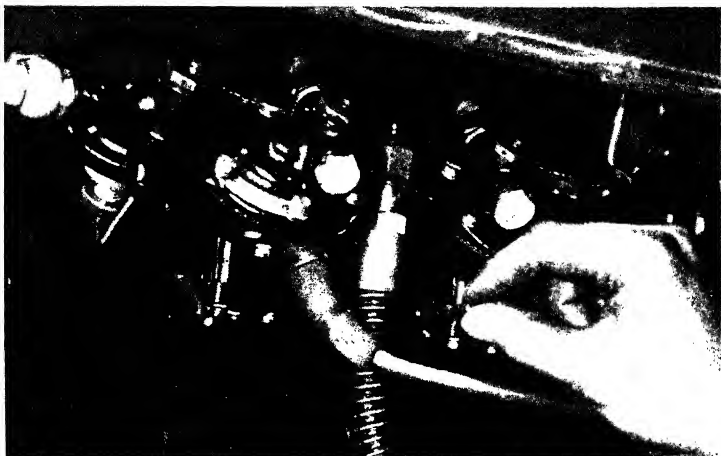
THE DE HAVILLAND A.C. FUEL PUMP FITTED TO GIPSY MAJOR ENGINE.
